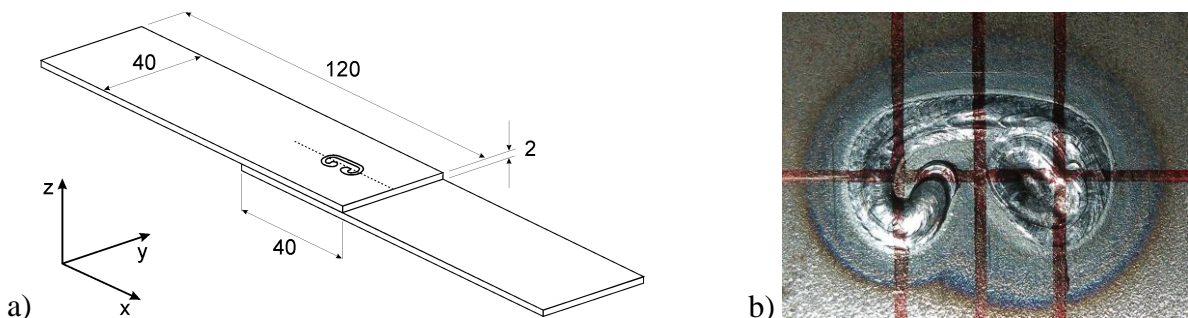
a) Sketch of the laser welded joint. The dashed line indicates the scan line for strain measurements. b) Top view of the pretzel weld.
